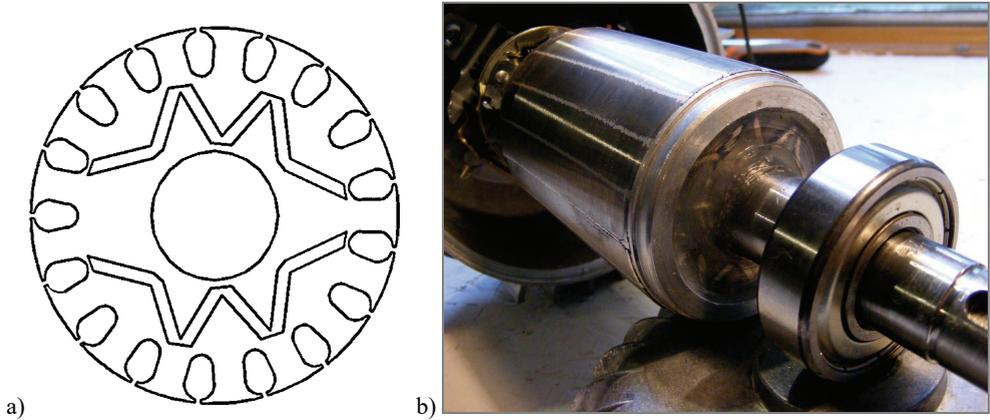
Rotor with interior permanent magnets and aluminium die-cast cage: (a) rotor sheet cross section, (b) rotor before assembly into stator
